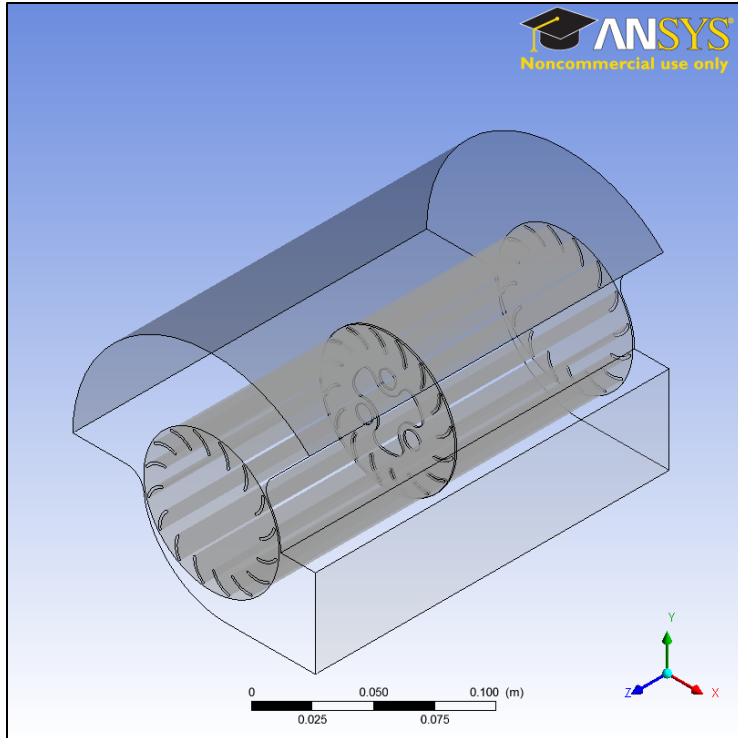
DesignModeler assembly of a straight-bladed CFF within its housing
